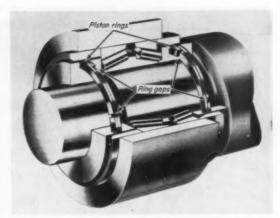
Piston ring sealing of a steel mill reduction gear drive. In this application, intense heat, water, and mill scale were present. Dual rings with staggered, straight-cut gaps are used. Replaceable bushings on shaft and in housing are ring contacting members. Rings are stainless steel alloy.
